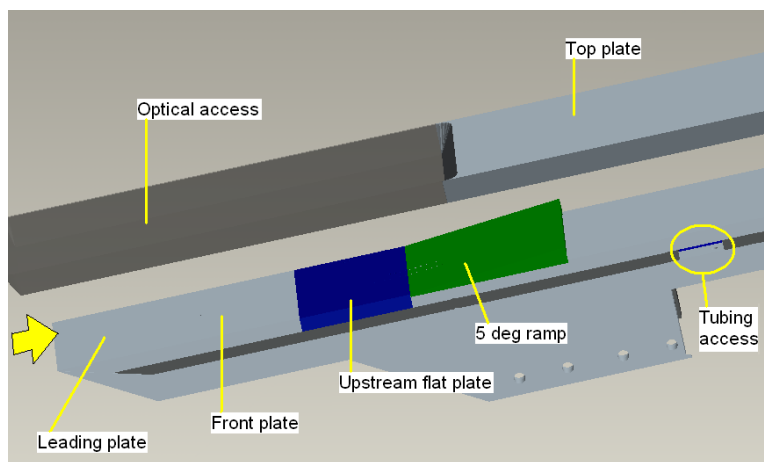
CAD rendition of "NoMVG+Ramp" assembly.
